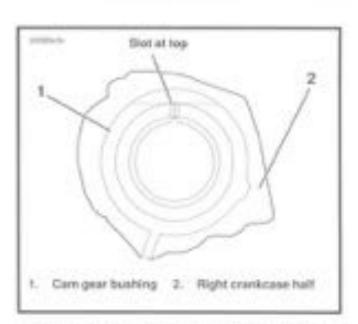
Com Gear Bushing Instalted in Crankcase
